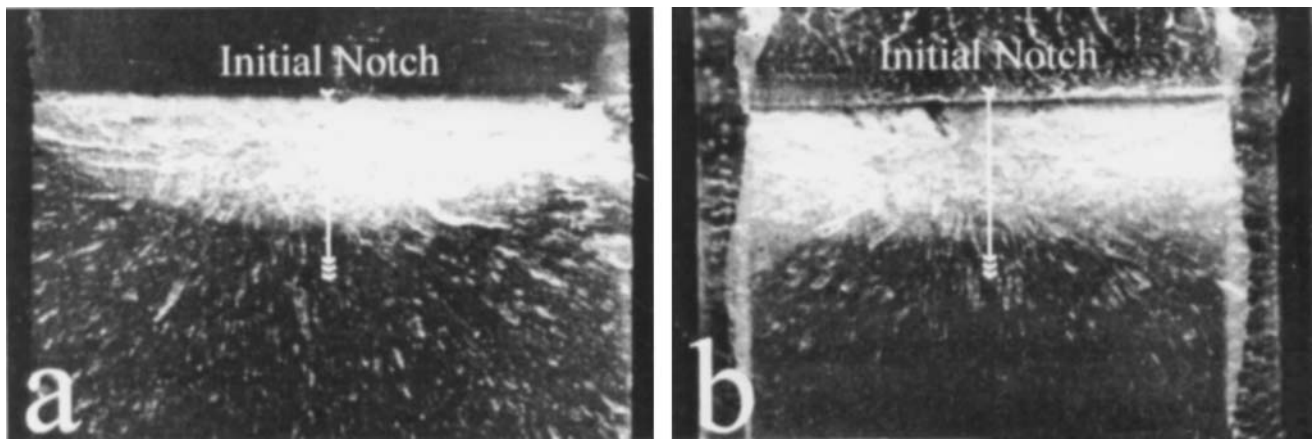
Fracture surfaces. *a*: plane-sided specimen, *b*: sidegrooved specimen. Arrows indicate crack propagation direction.
